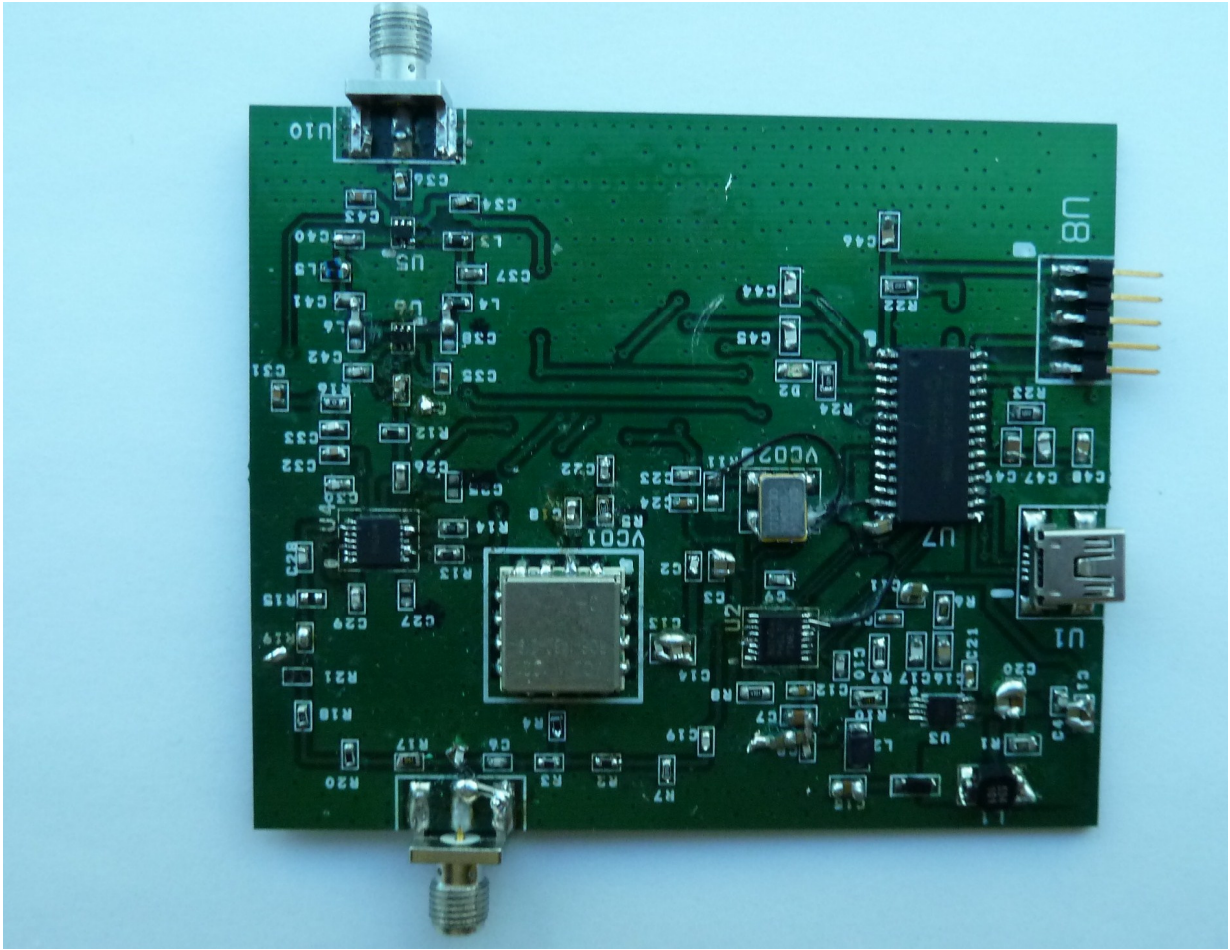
Assembled Printed Circuit Board (PCB) of the Transmission Meter
